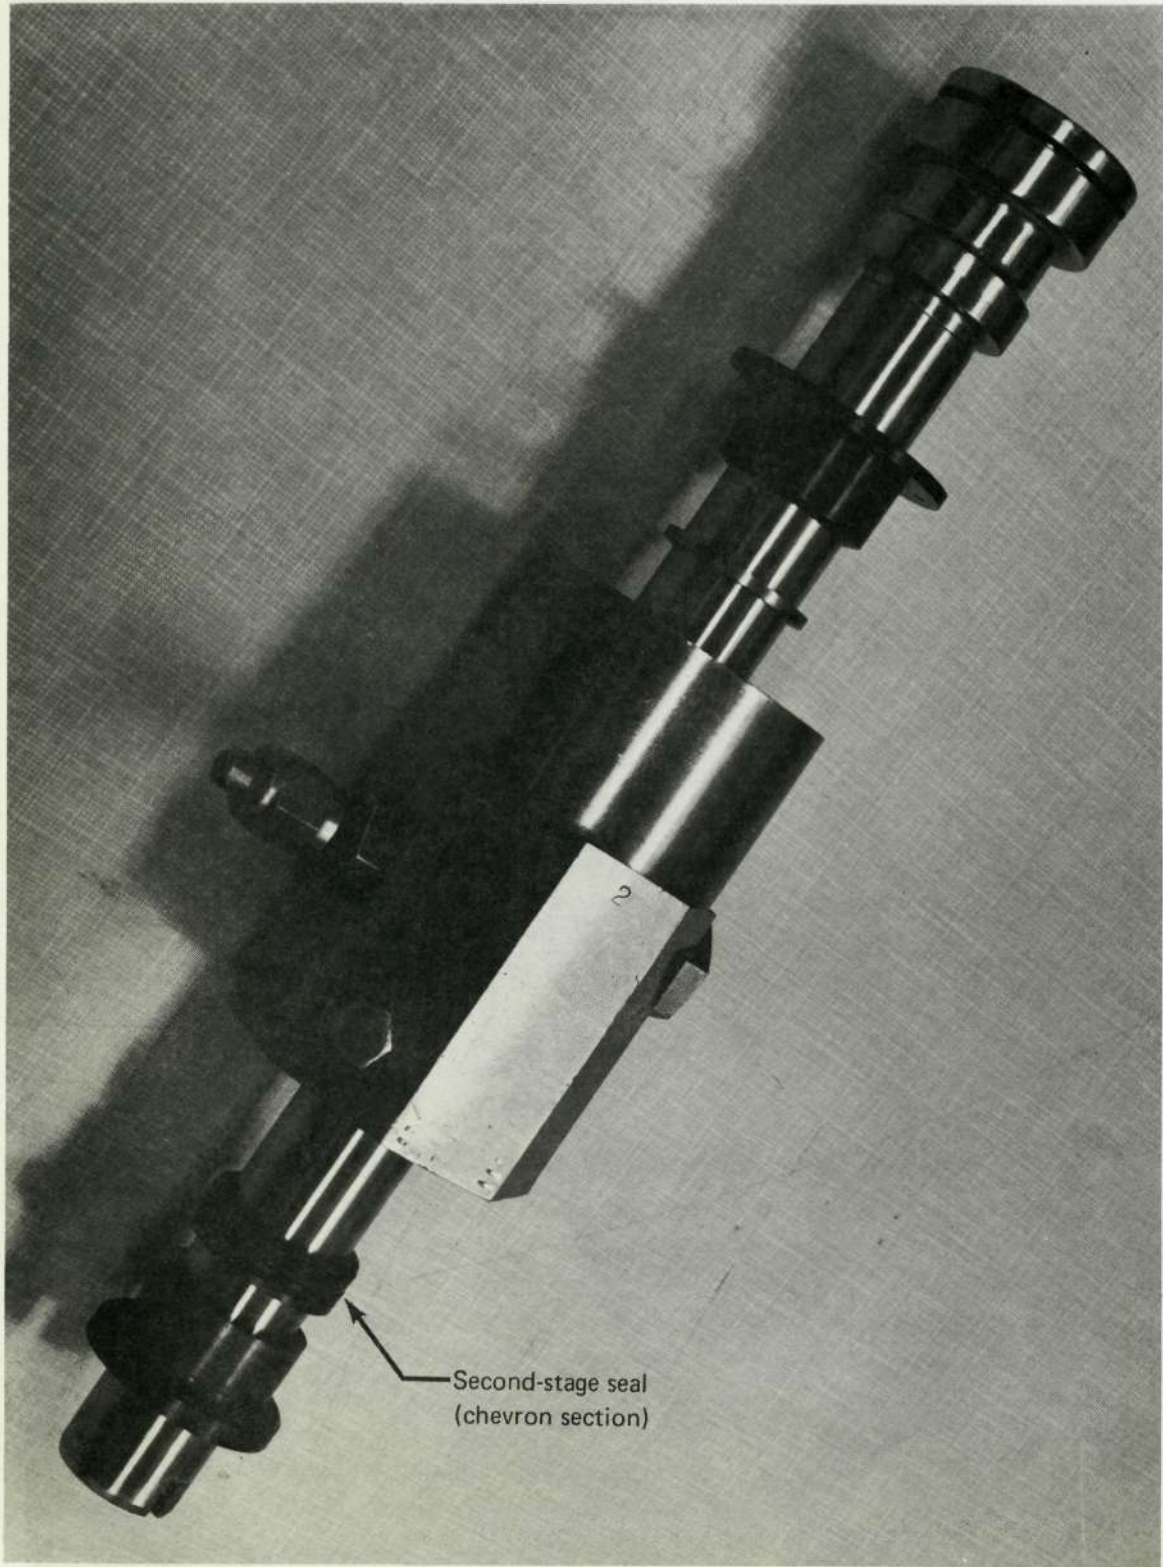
2.54 CM (1.0 IN.) ENDURANCE TEST ACTUATOR
